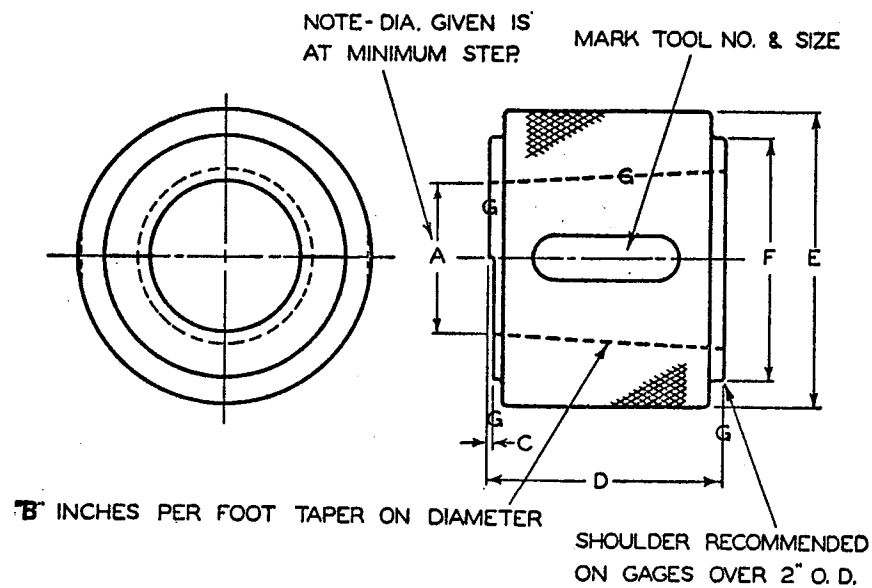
Recommended design of taper ring gage and method of dimensioning.
